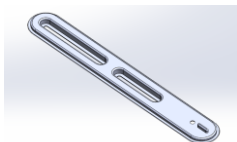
3D isometric View of Mounting Interface Profile Arm
